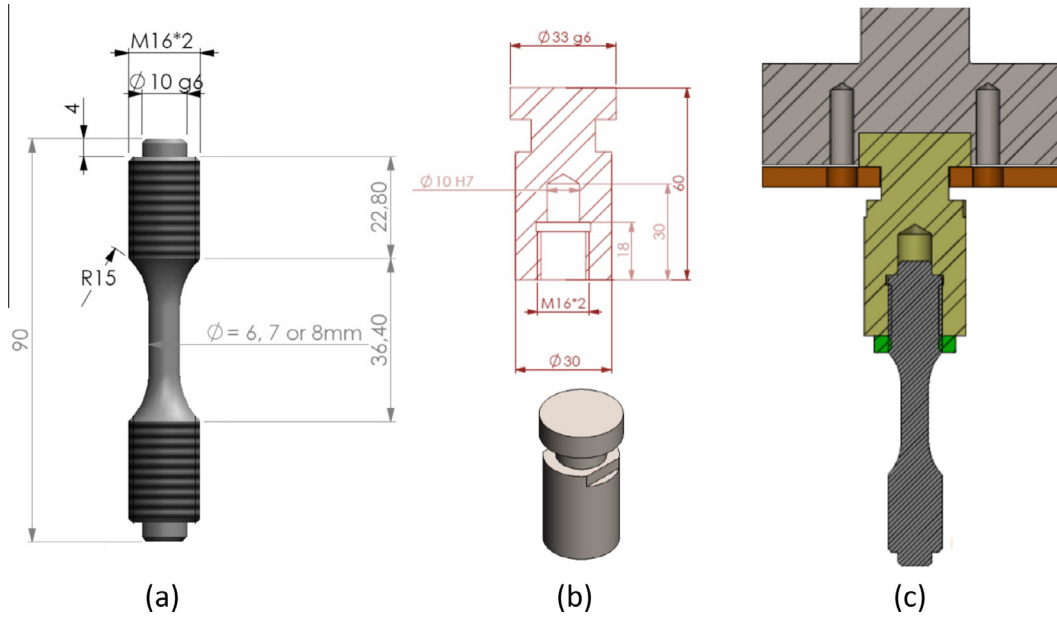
(a) Specimen geometry, (b) gripping device and (c) complete assembly.
